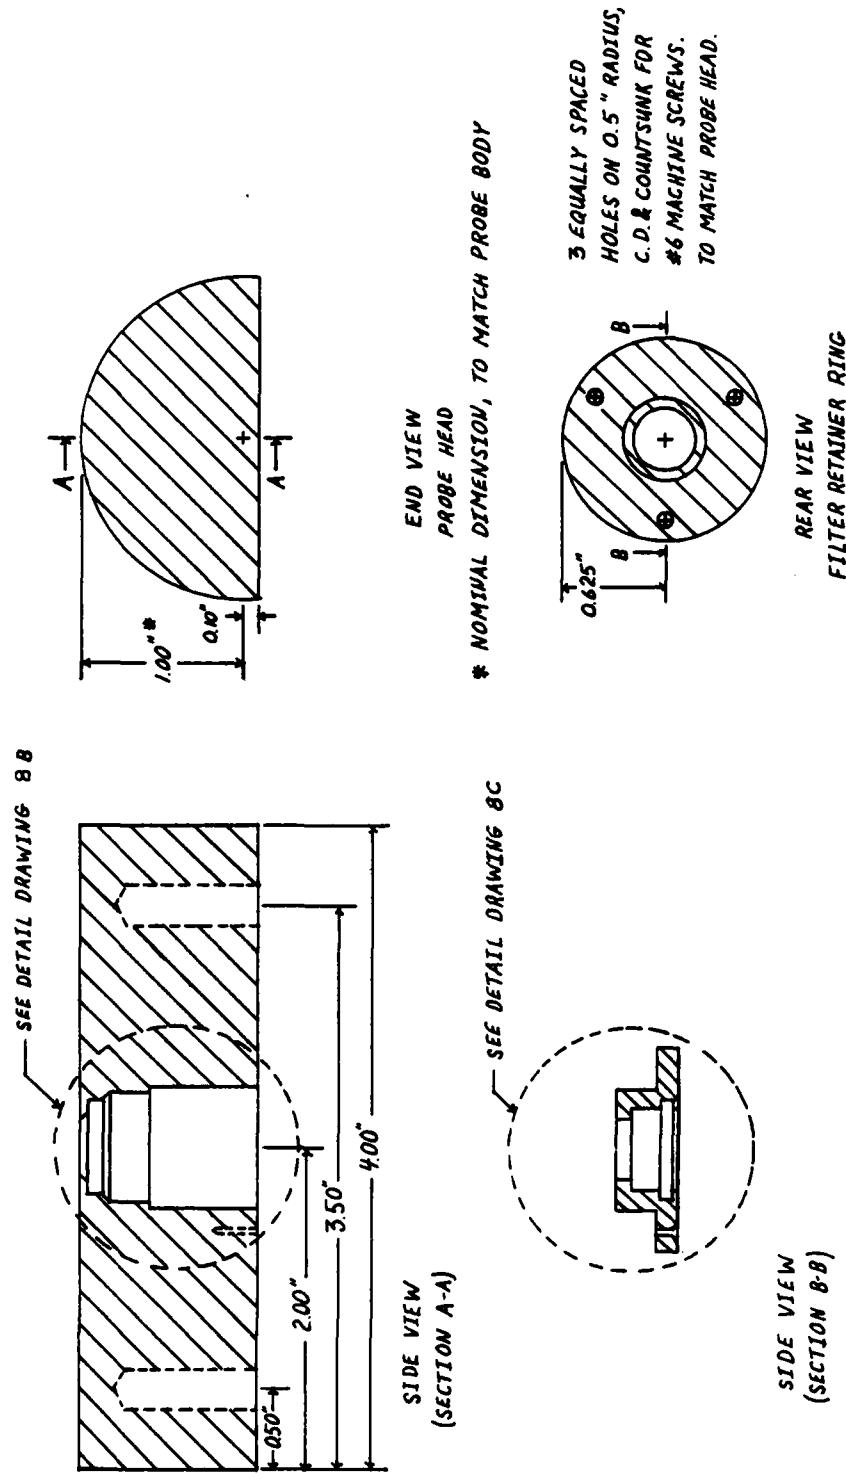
Engineering drawings of the probe head and filter retainer ring.
